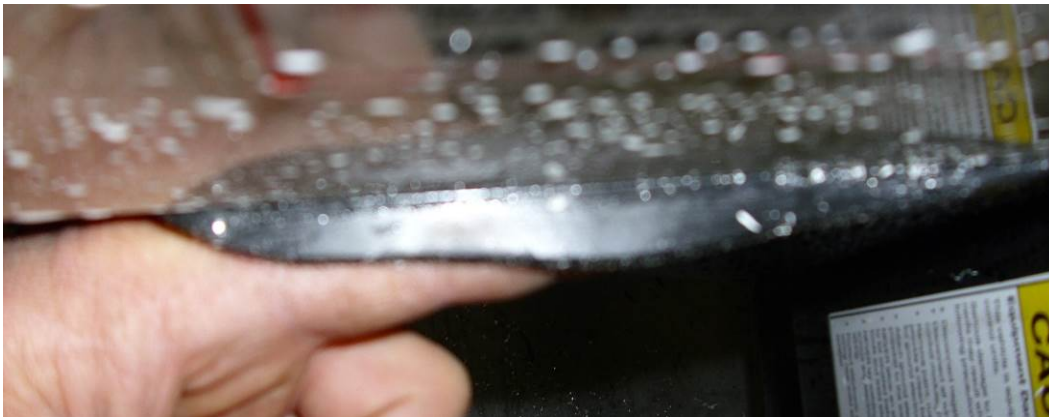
Push out of approx. one inch or more is considered excessive, and the isolator should be replaced.
